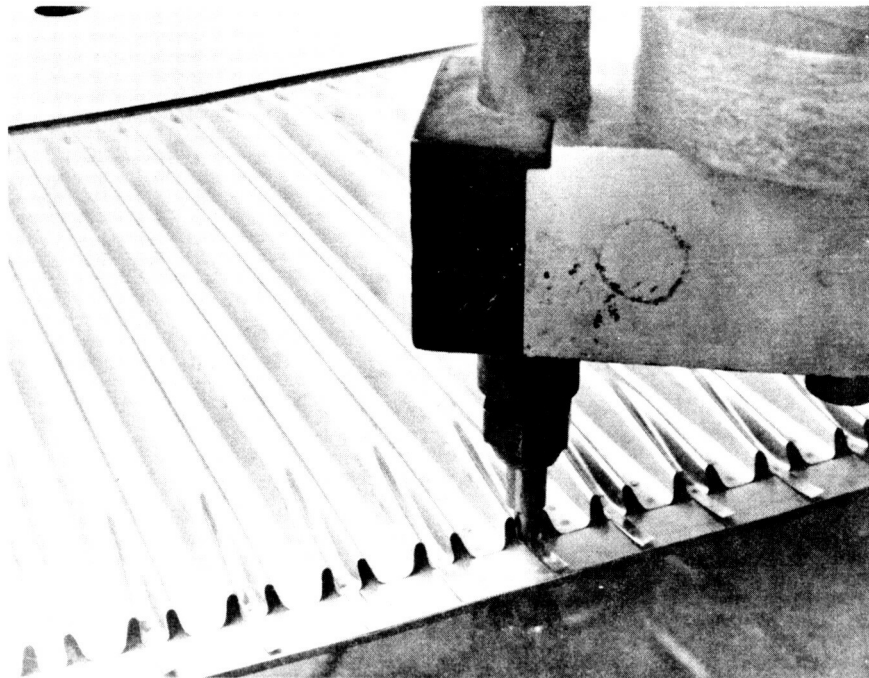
SPOT WELDING CREASED-EDGE CORRUGATION TO SKIN AND DOUBLER (REF. 32)
